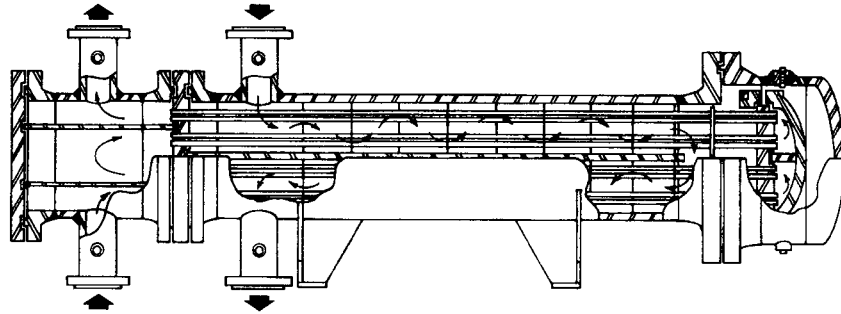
J. Split-ring removable floating head, four-pass tube-side and two-pass shell-side. (Used by permission: Engineers & Fabricators, Inc., Houston.)
